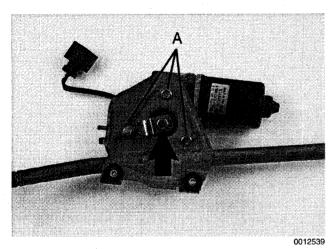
Wiper linkage crank nut (arrow) and wiper motor mounting bolts (A).
